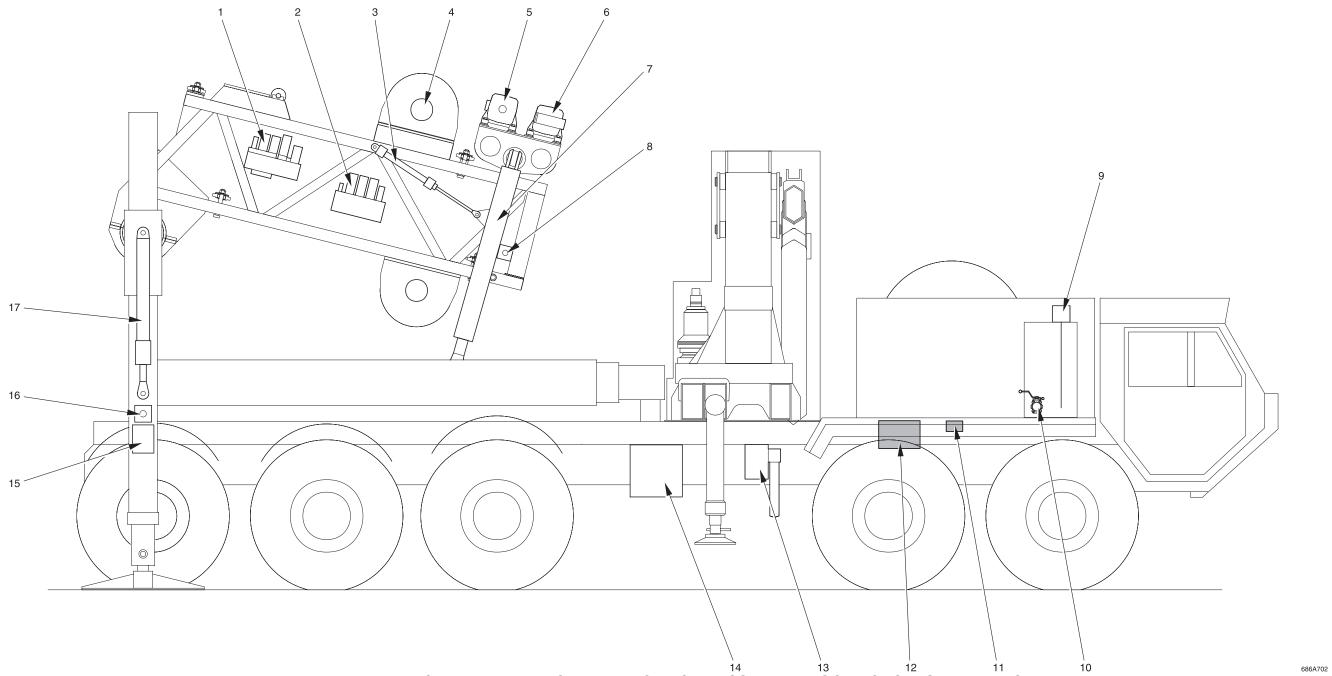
LAUNCHER HYDRAULIC AND ELECTRICAL ASSEMBLY LOCATIONS LEFT HAND SIDE
